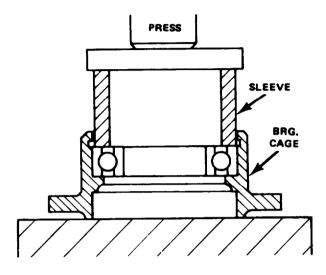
Output Shaft and Bearing Cage Assembly (Original Model)
